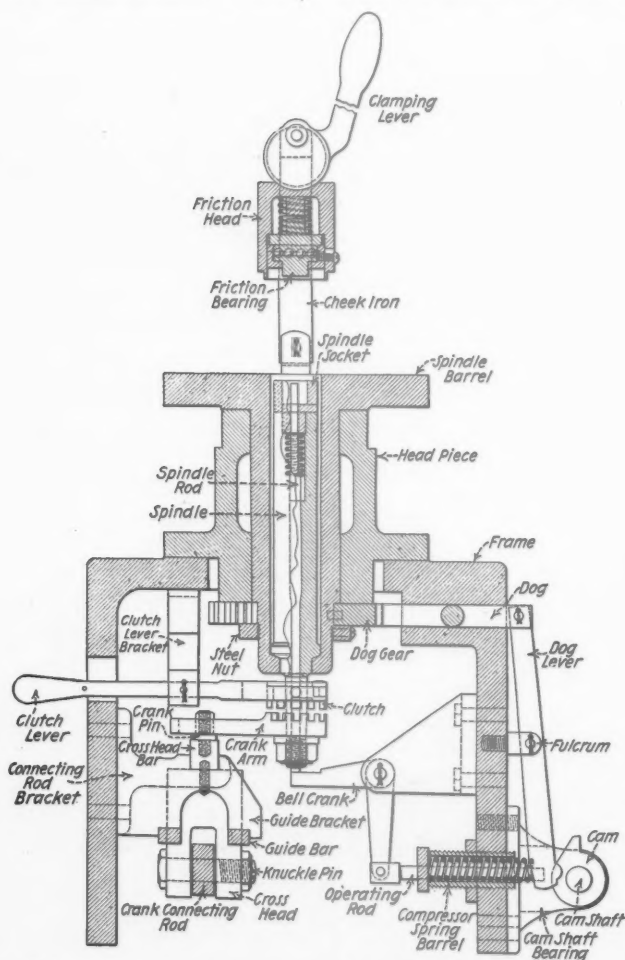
Cross-sectional view of one unit of the machine shown in Fig 1
